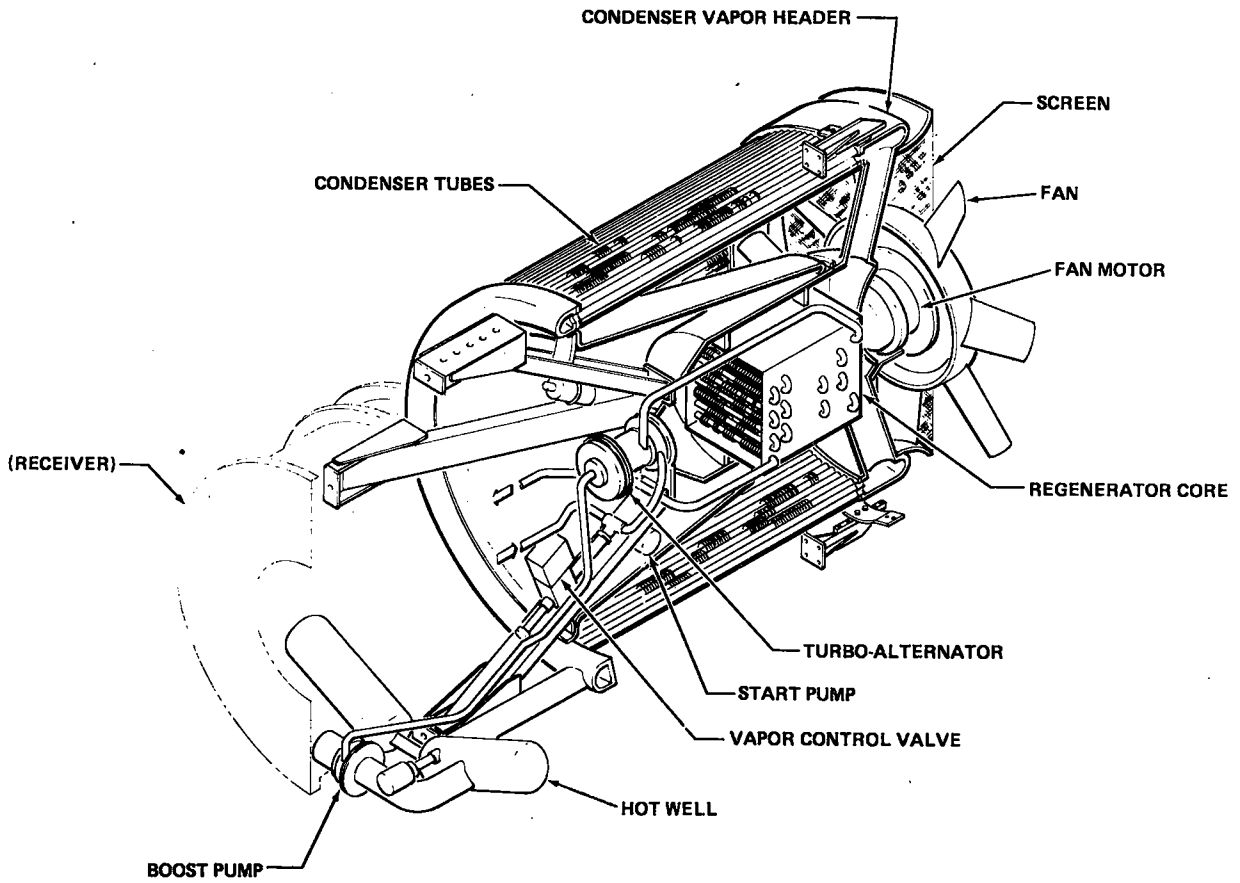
CUTAWAY VIEW OF POWER CONVERSION SUBASSEMBLY
